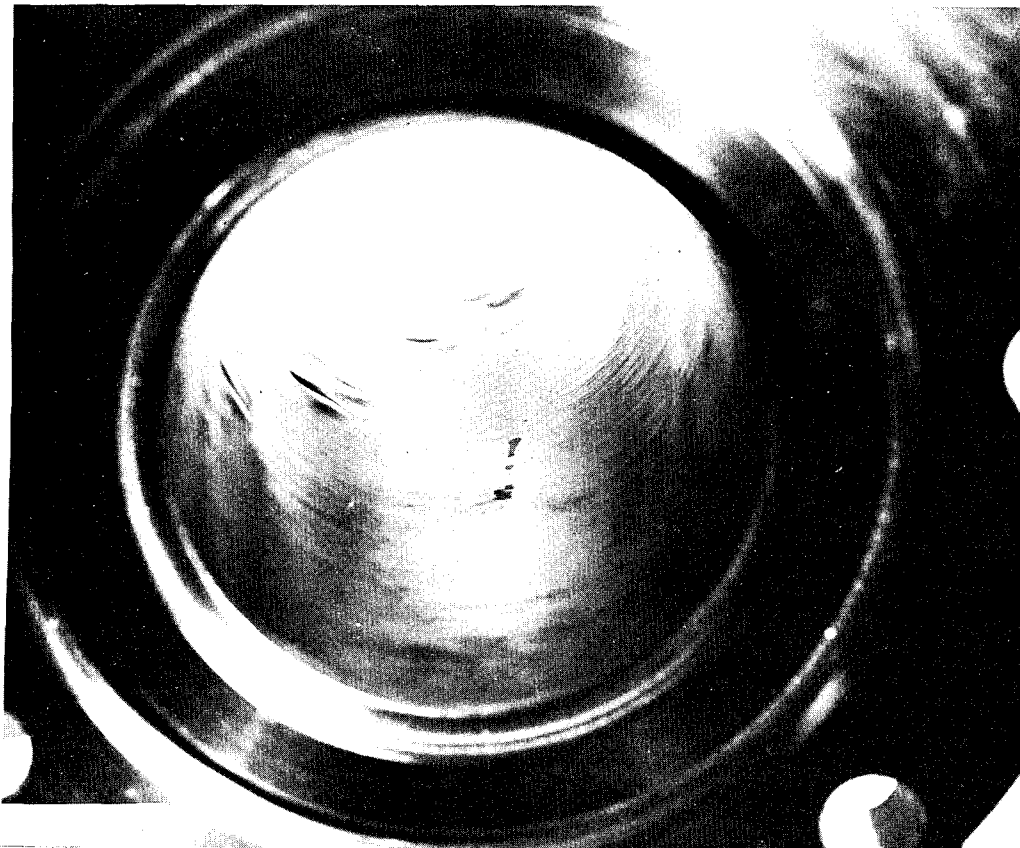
Torsion Failure Mode 2 in. (5.08 cm) Diameter Flat Flange
